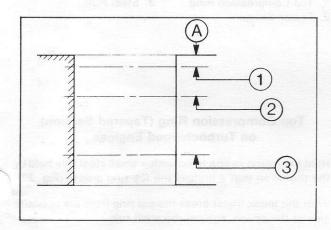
Cylinder Bore Wear Measuring Locations (See Text)
